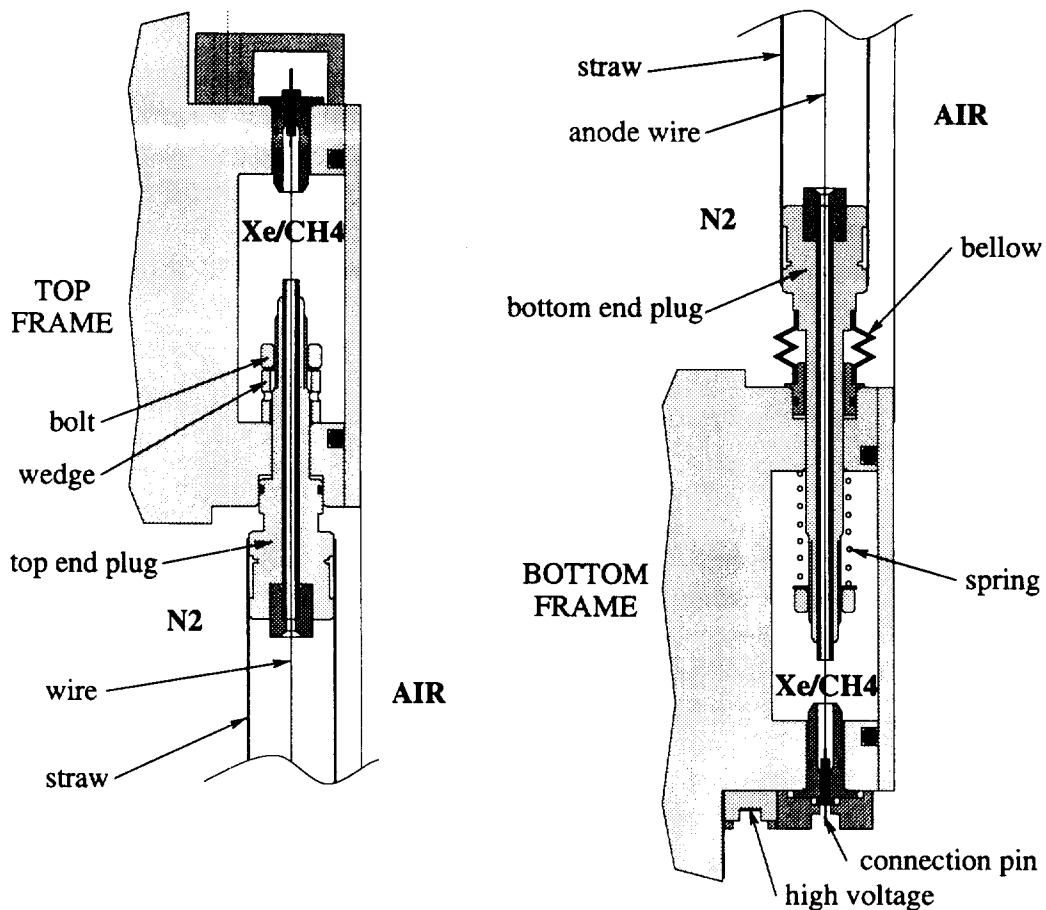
Assembly of the straws and wires in the TRD frame (top and bottom cut views).
